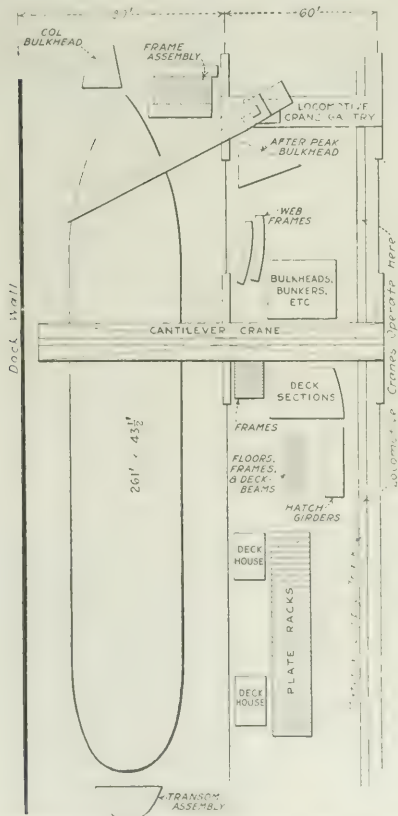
FABRICATED MATERIAL STORED AND ASSEMBLED IN BAY BETWEEN CRANE TRACKS
